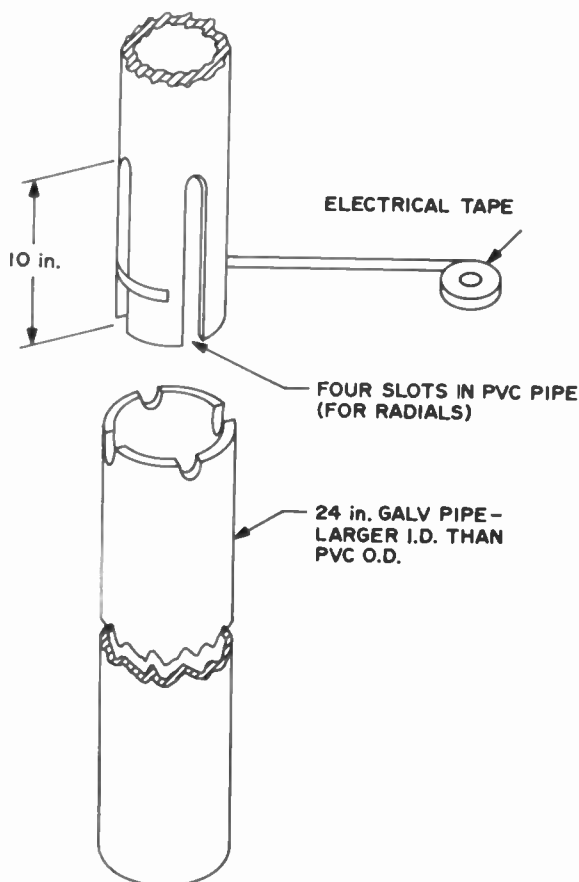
Long slots in the PVC pipe will hold the radials in place with the antenna inserted. Wrap the bottom well with electrical tape after the antenna is installed in the fiber tube. Notch four matching places on a 2 ft length of galvanized pipe to seat, and try for a snug fit.
